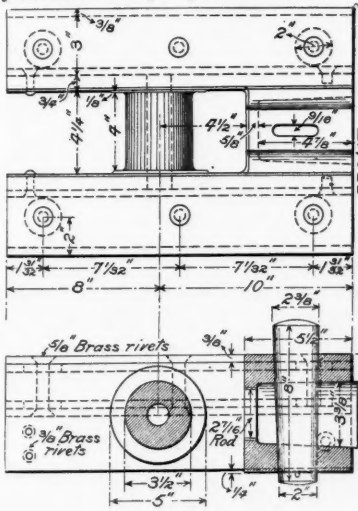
Details of Crosshead—C., C., C. & St. L. Locomotive.
